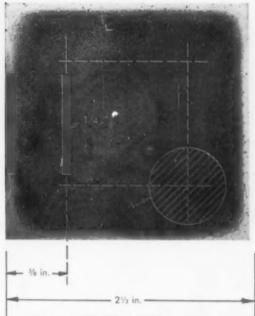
Etched Cross Section of Square Extrusion, Showing Location of Surface and T/4 Test Pieces in This Investigation as Well as Specified Position A of Tensile Test Piece for Acceptance
